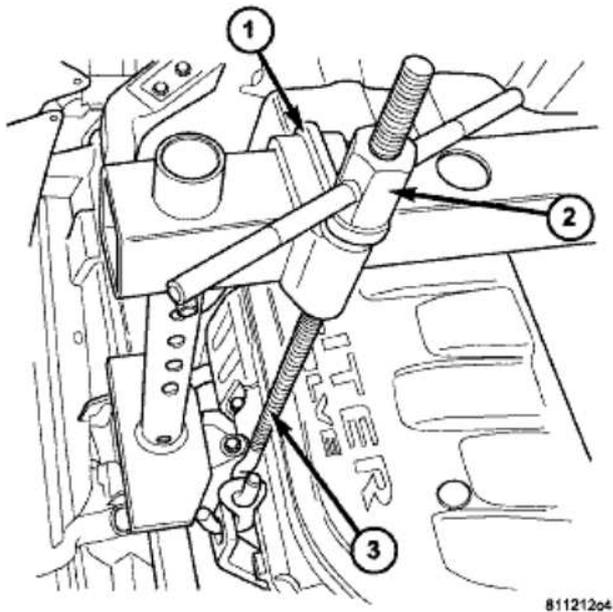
Identifying T-Handle, Lifting Bracket, & Hook Assembly
